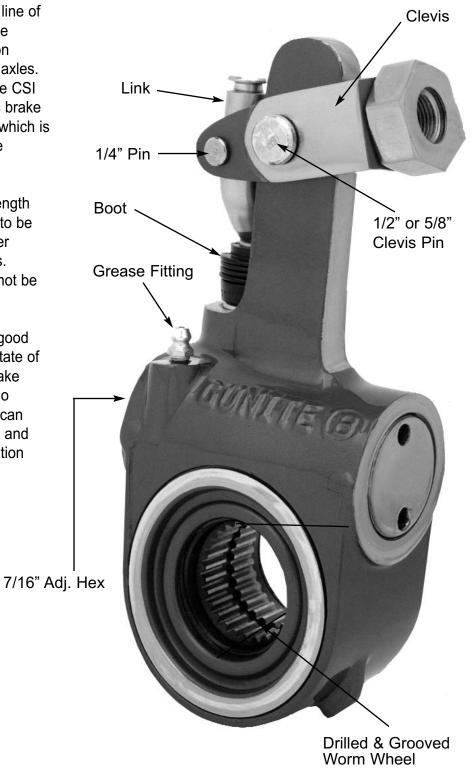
Standard Brake Adjuster With Collar Lock Clevis.
